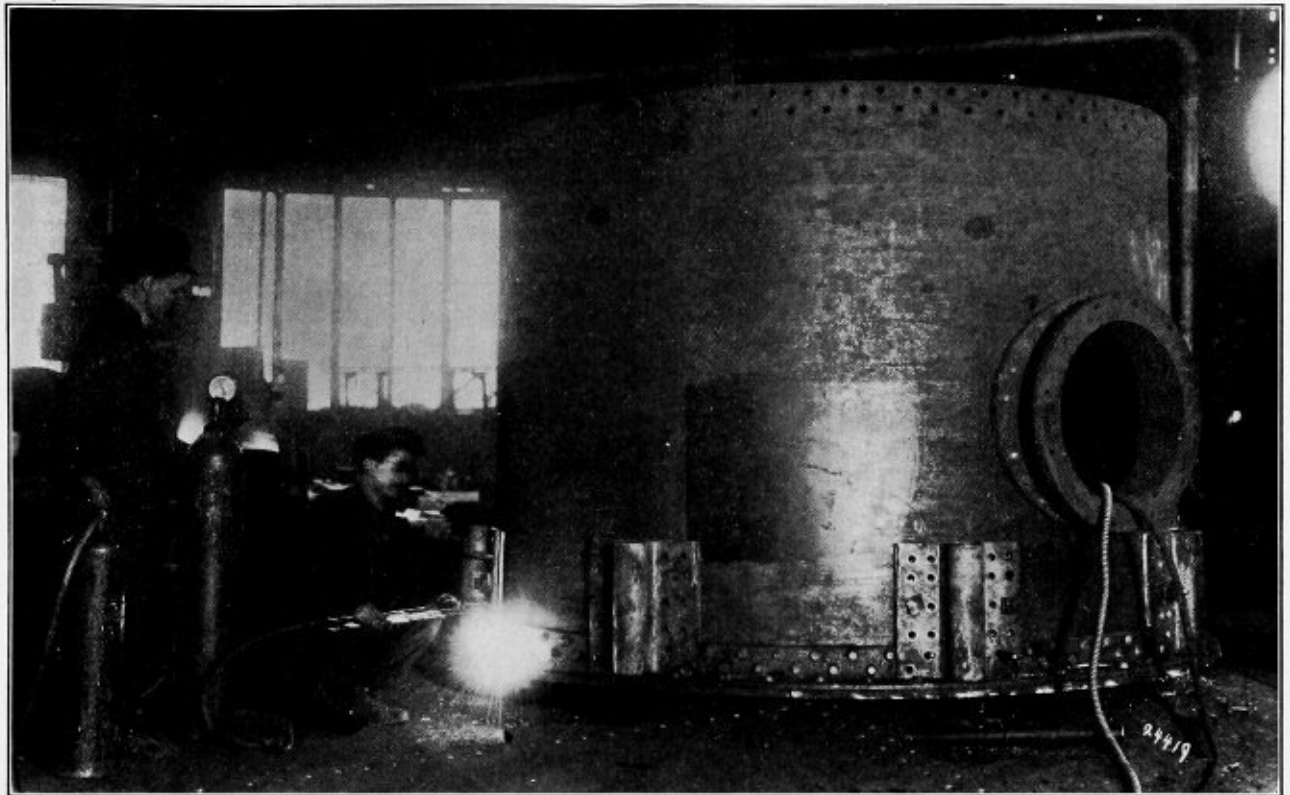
Welding Up Crack in Heavy Angle Iron Ring
